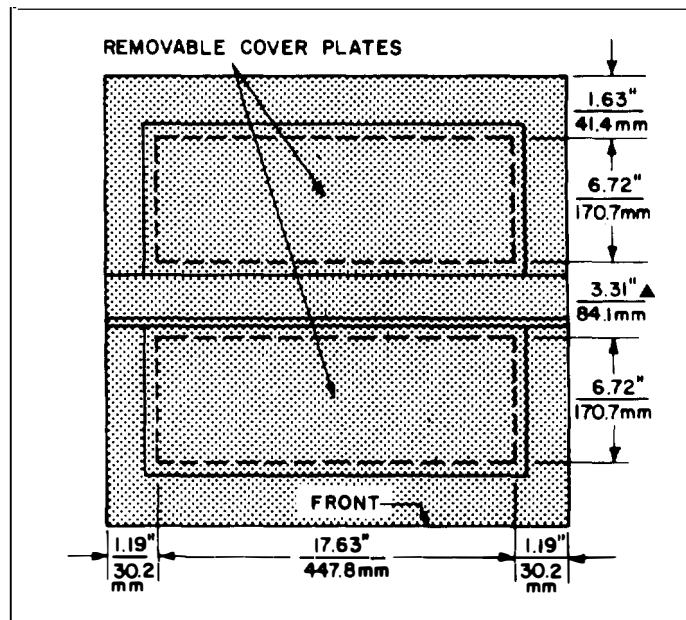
Top conduit entrance space for 22-inch and 20-inch (508 mm) deep section.
